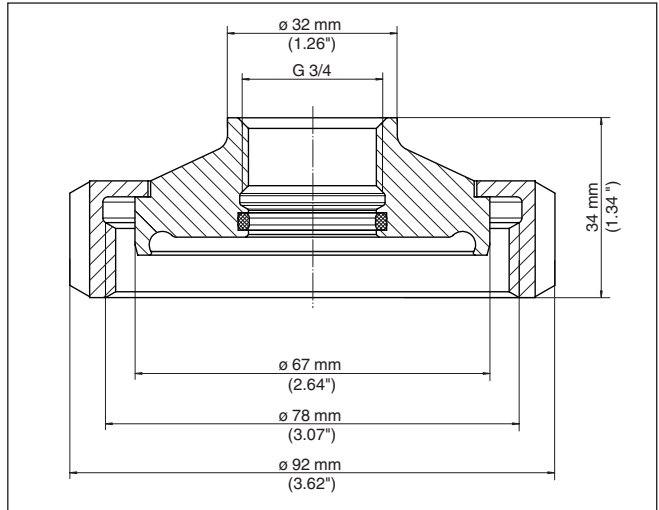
Dimensions of threaded adapter G $\frac{3}{4}$  (DIN 3852-X) on slotted nut DN 50 (DIN 11864-1) PN 16
